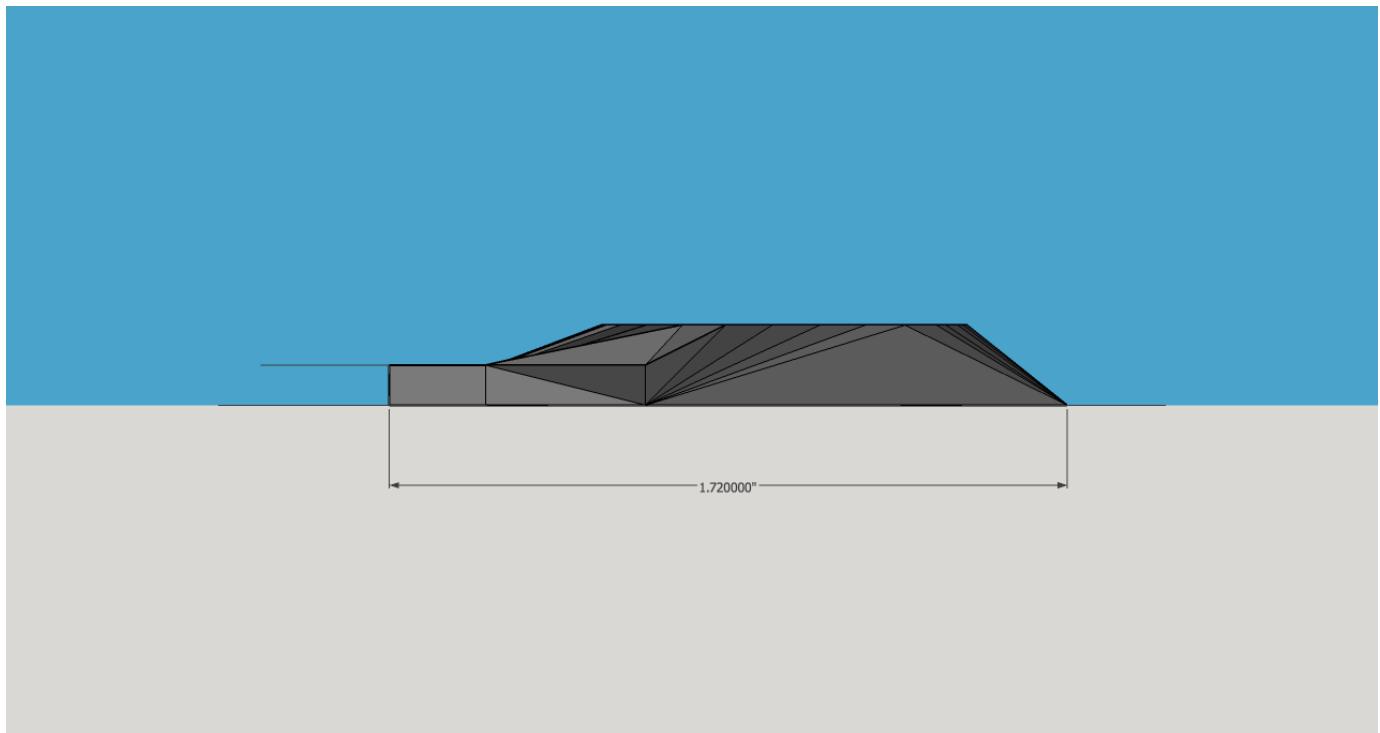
The back cross section view and measurements of the sFPI aluminum base
